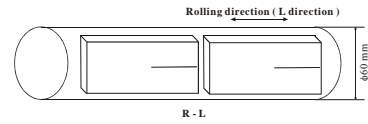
Mode II fatigue crack growth test specimens cut from the rolled bar.
